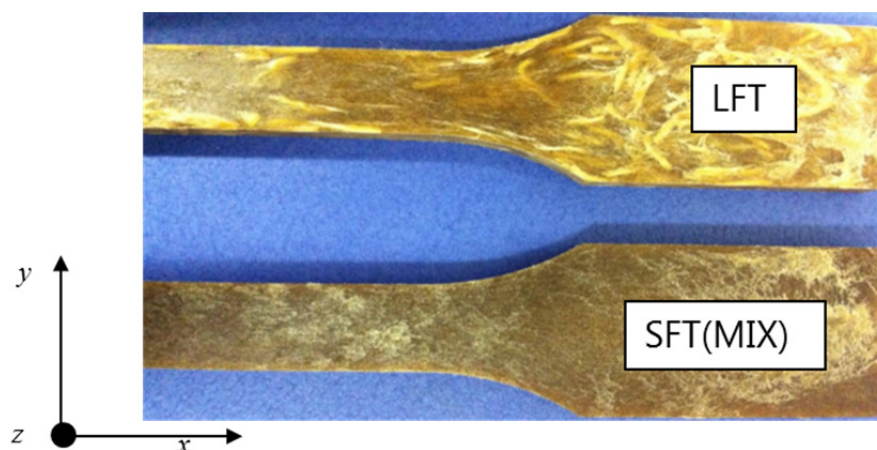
The appearance of injection-molded specimen from Jute/PLA LFT pellets and SFT(MIX) pellets.
